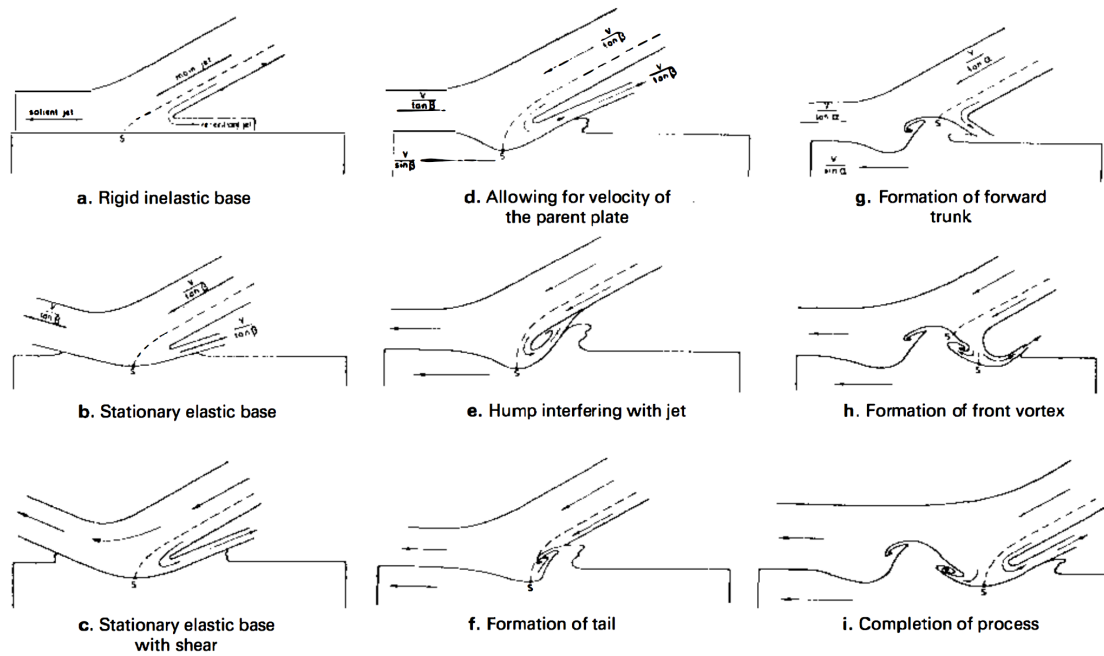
Illustration of the wave formation process in explosion welding but can be applied to any high impact welding. The jetting process illustrated is key to the bond formation mechanism in explosively welded components
